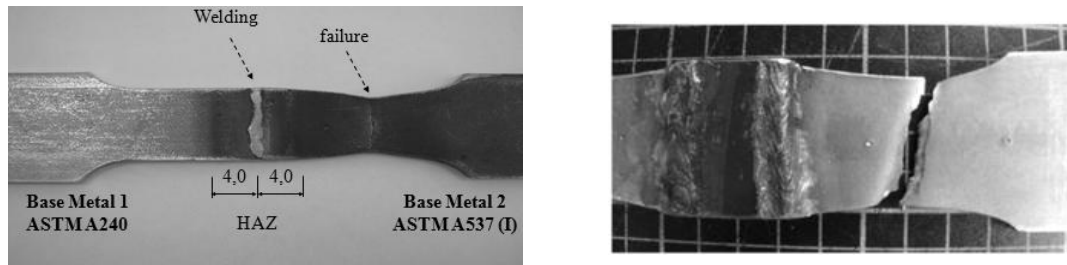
Specimen butt and overlap welded, tested in tension, measures in mm [1, 2].
